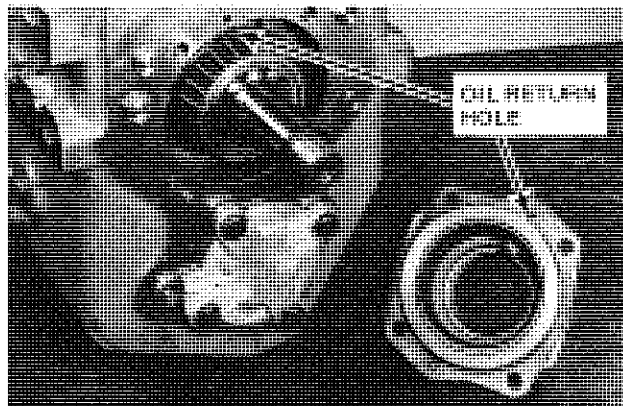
Mainshaft Rear Bearing Cap and Gasket
